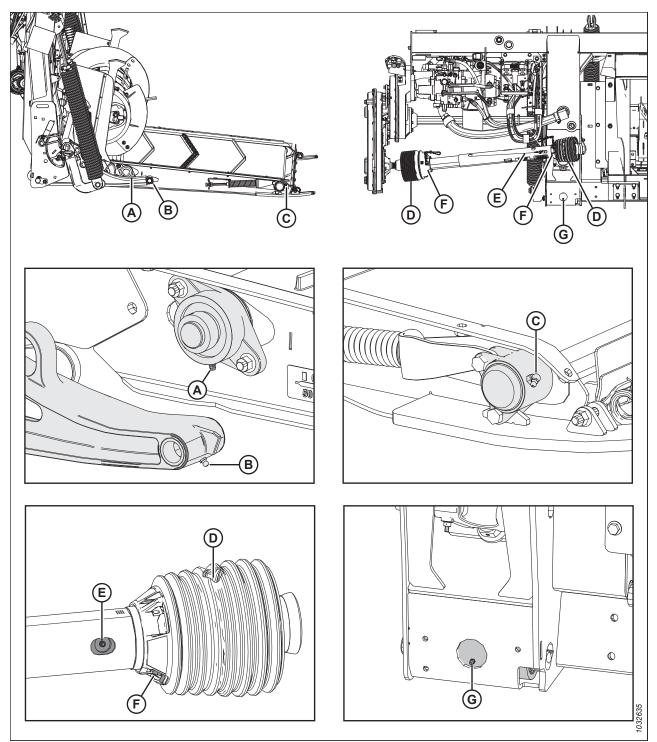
Float Module Grease Zerks – Feed Draper and Gearbox
